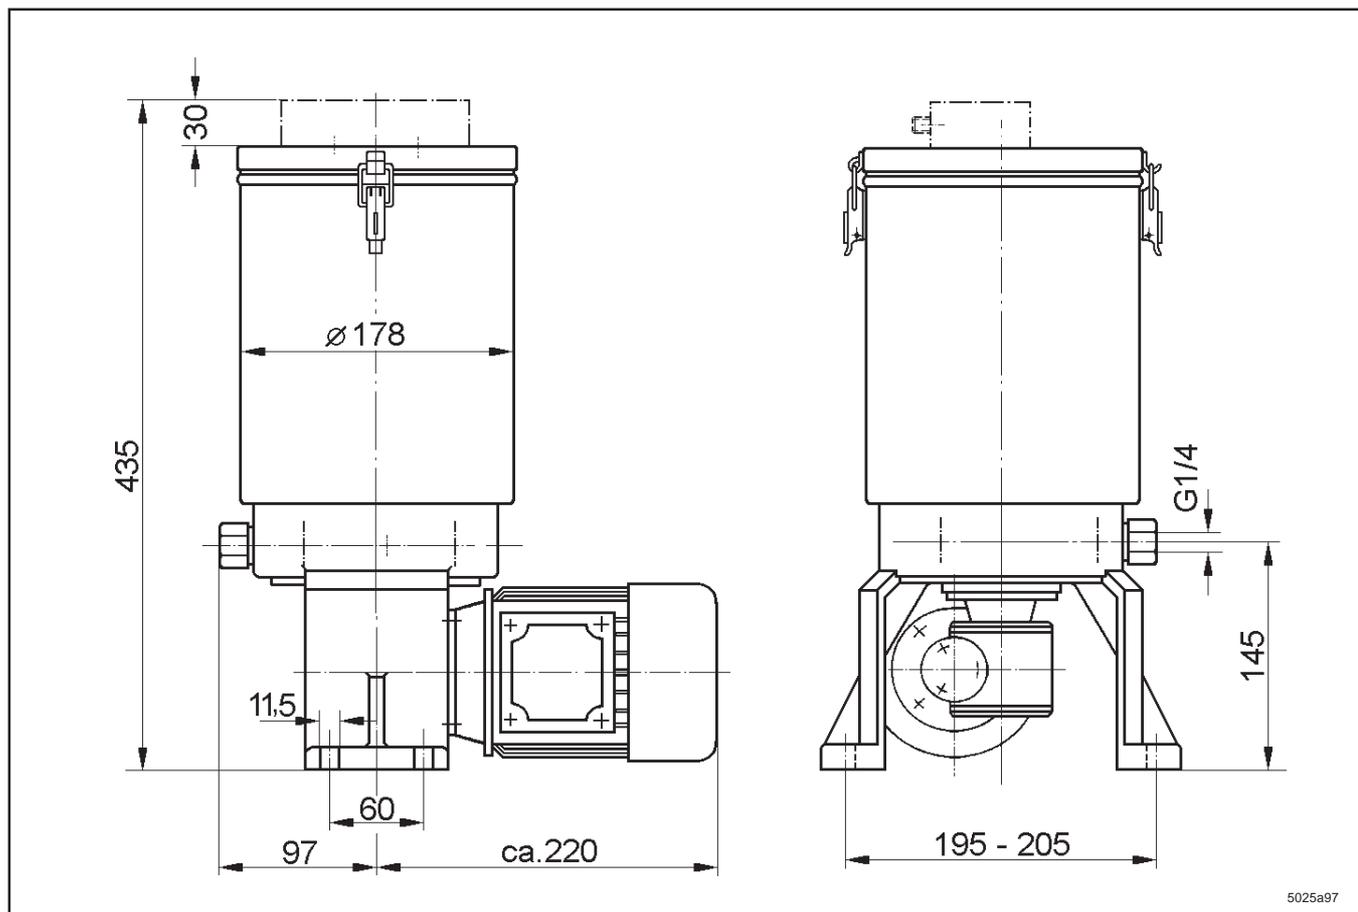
Dimensioned drawing of pump P 205, single-stage gear, 5 l sheet metal reservoir, motor drive
